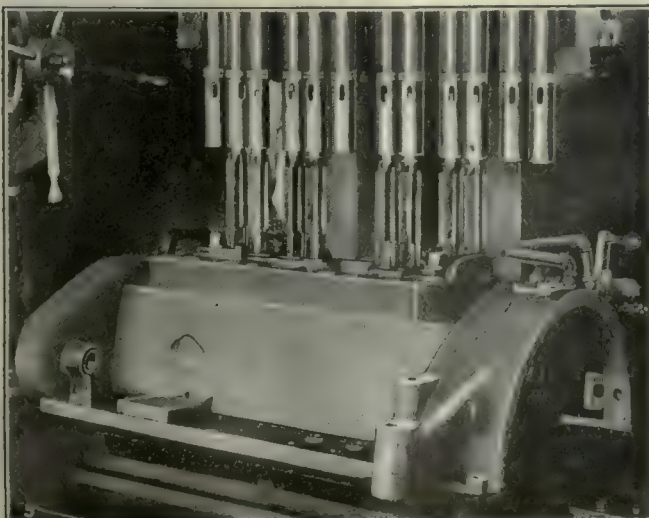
REAMING THE VALVE GUIDE HOLES. FIG. 6—DRILLING ANGULAR OIL HOLES
